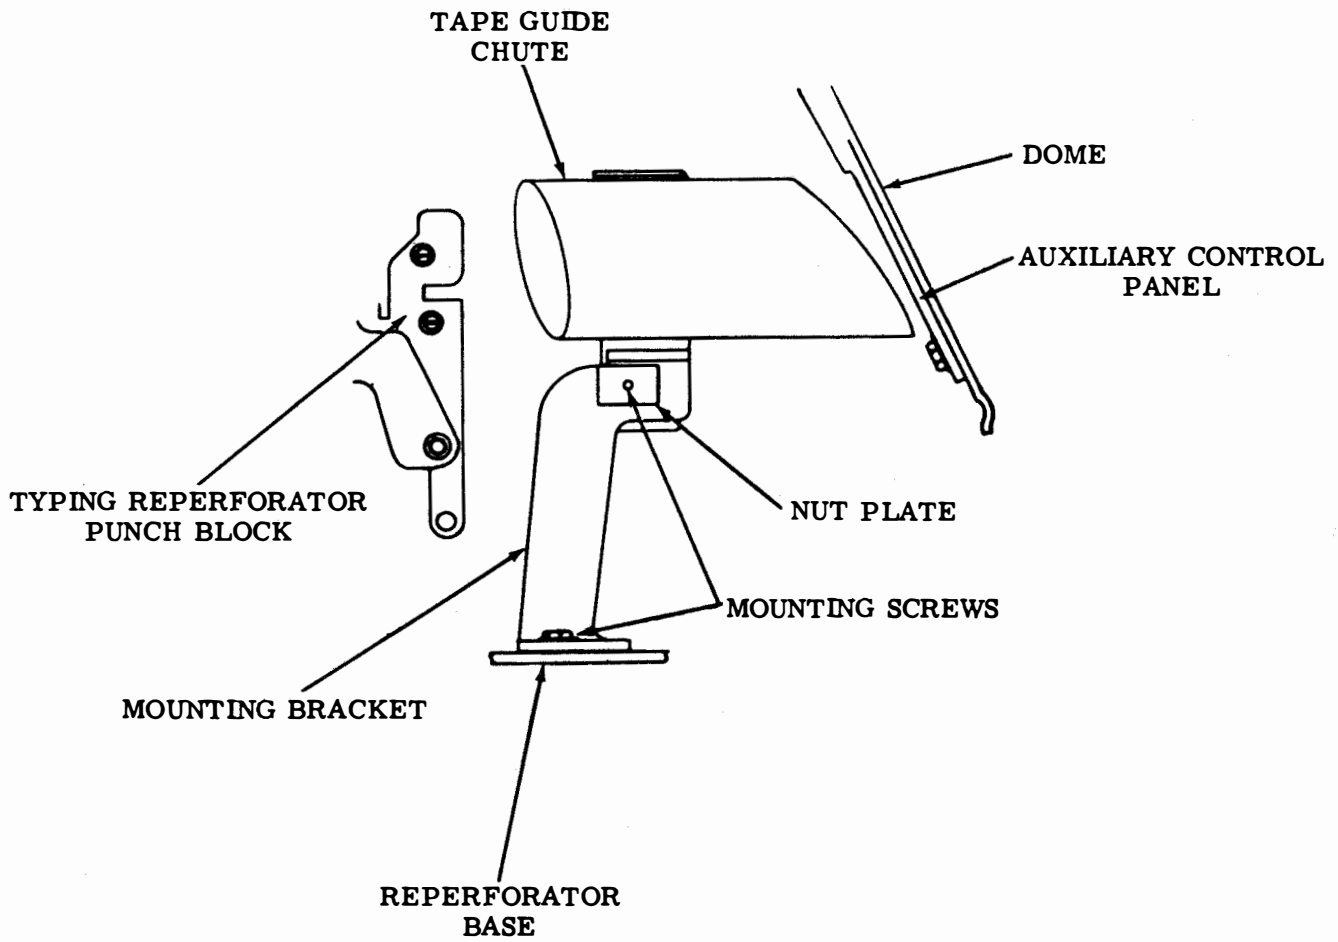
Tape Guide Chute for Auxiliary Typing Reperforator, Left Side View
